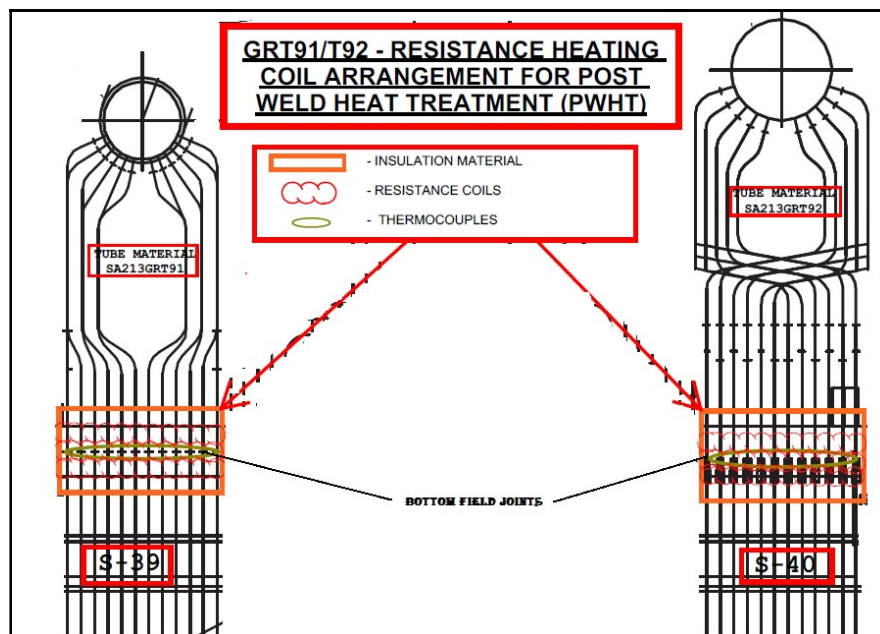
Resistance heating Coil arrangement for PWHT of T91/T92 tube assembly
